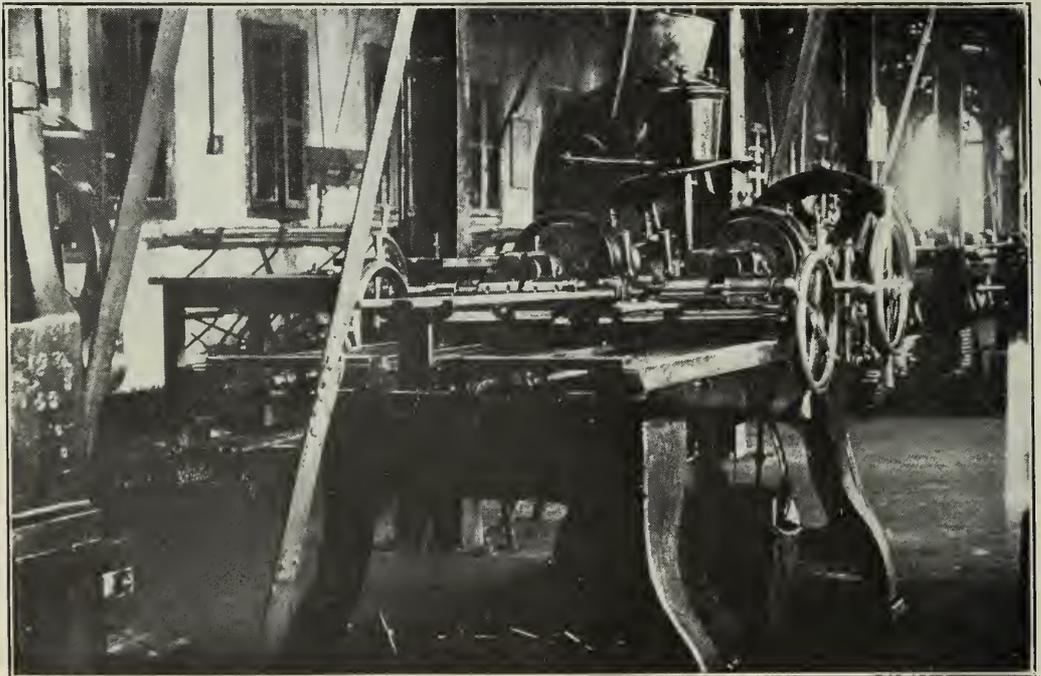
SCREWING COPPER STAYS ON ACME DUPLEX SCREWING MACHINE.
